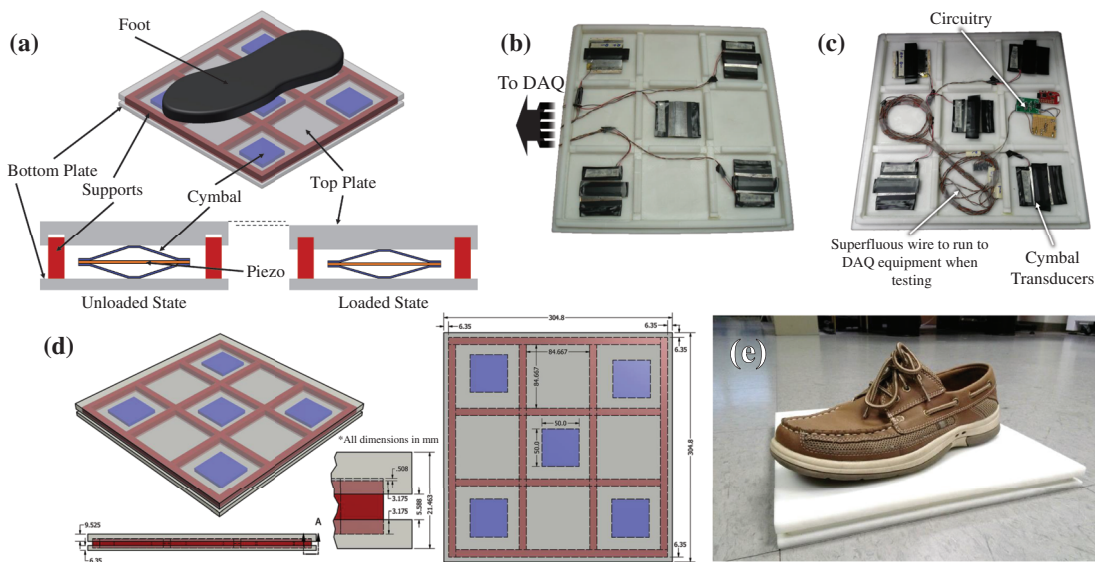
(a) Illustration of tile enclosure parts in unloaded and loaded states, (b) fabricated enclosure (with top plate removed) used when testing with human step inputs, (c) final fabricated enclosure (with top plate removed) with all components internal to the tile, (d) dimensioned drawing of floor tile enclosure, and (e) fully assembled STEP Tech floor tile with size 9 (US) shoe for scale.
